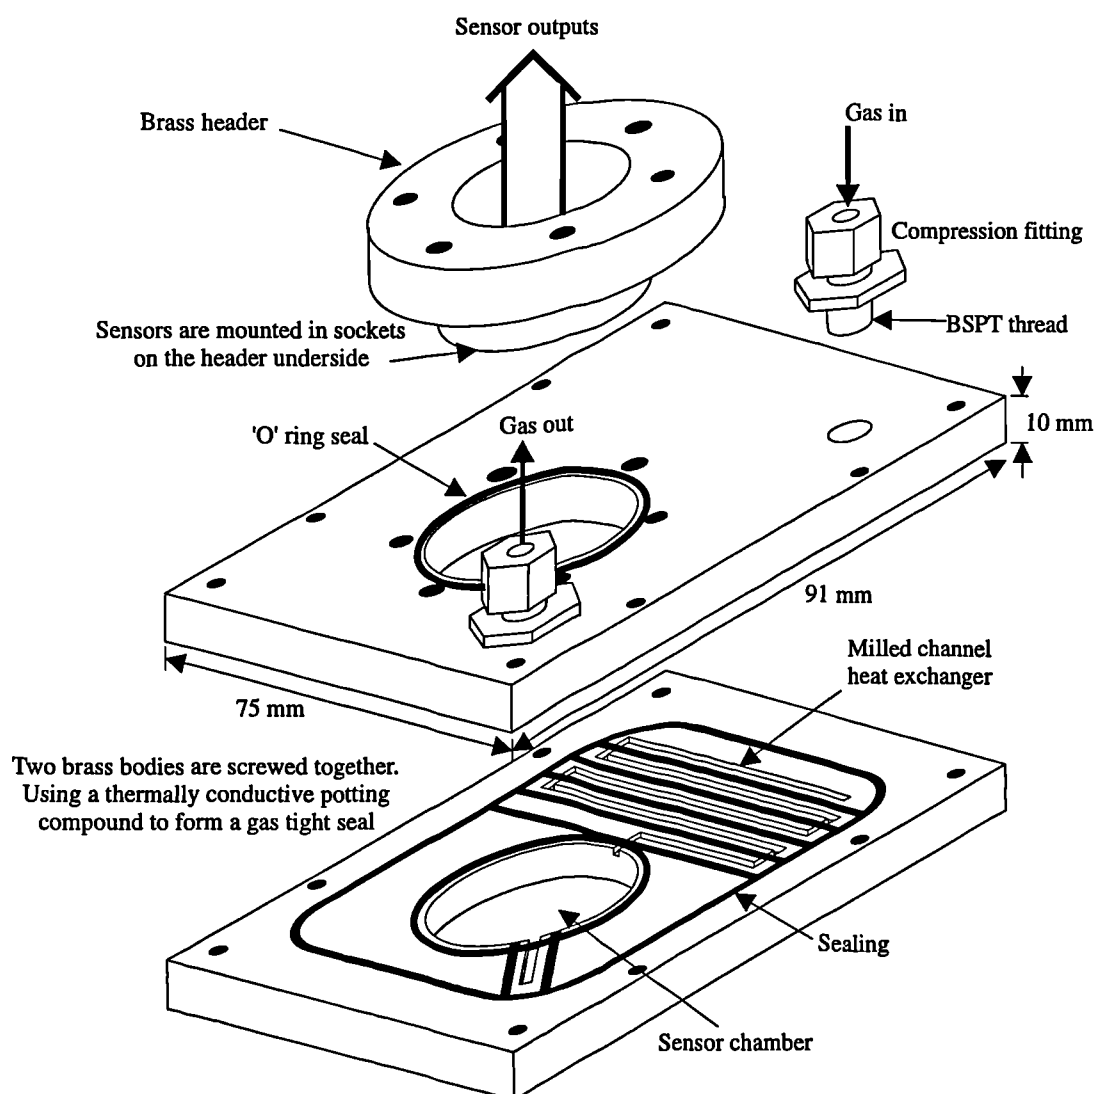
A semi-exploded diagram of the brass block sensor housing.
